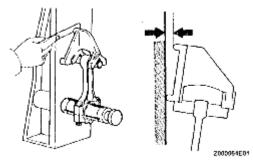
Checking Connecting Rod Alignment For Misalignment
